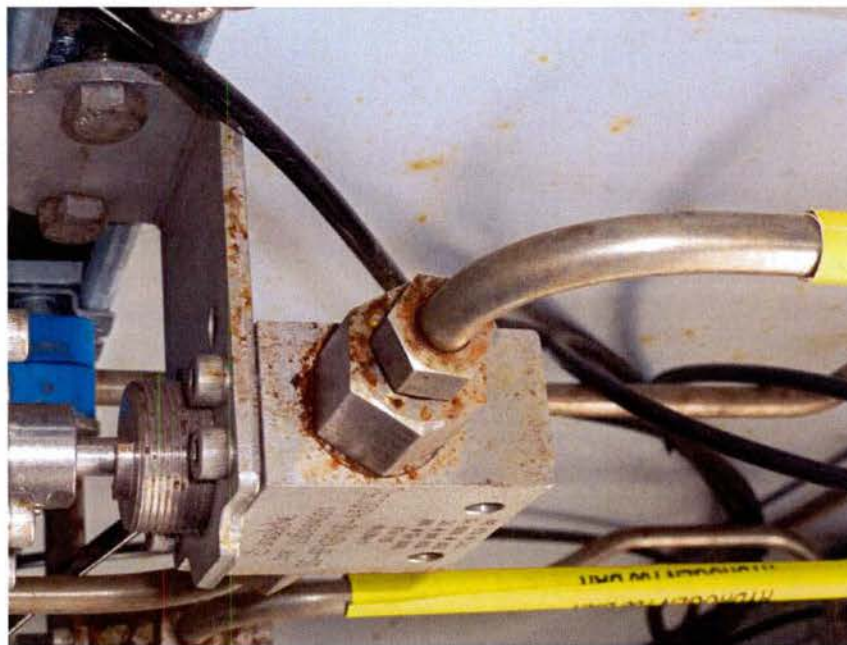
Corrosion on Stainless Steel Fittings and Valve
